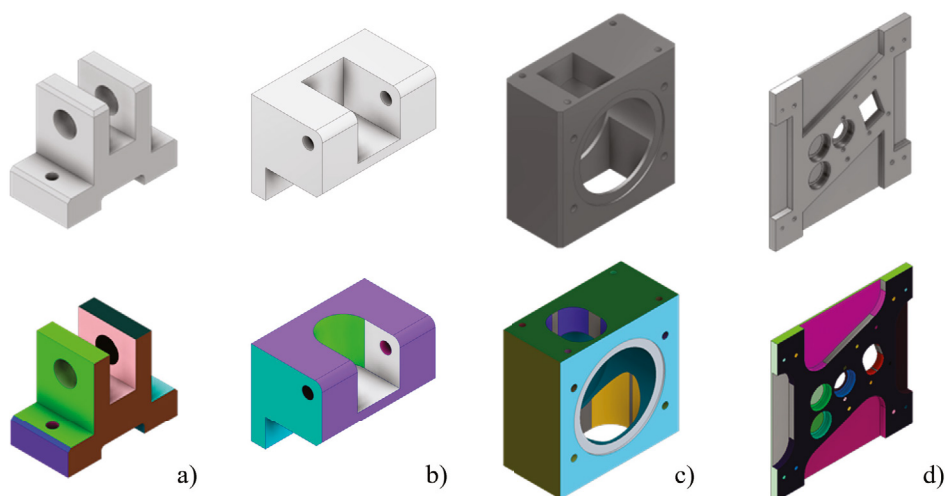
Application Examples: (a) Bearing Block; (b) Hinge; (c) Cellular wheel housing; (d) Cover Plate.
